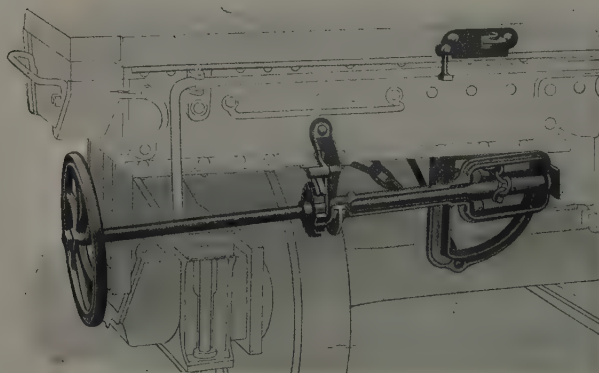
Barber Tilting Brake Staff. Standard Car Truck Company.
